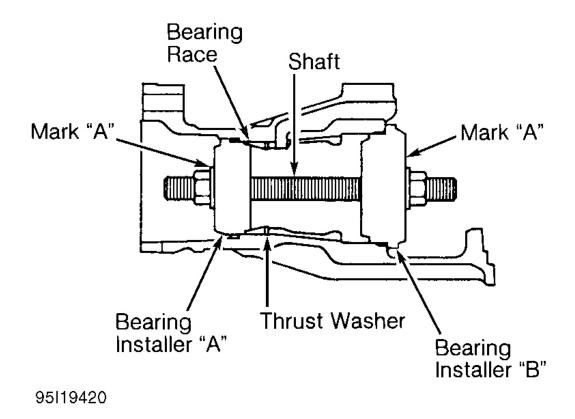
Installing Bearing Race (Outer Race Shown; Inner Race Is Similar) Courtesy of AMERICAN HONDA MOTOR CO., INC.
